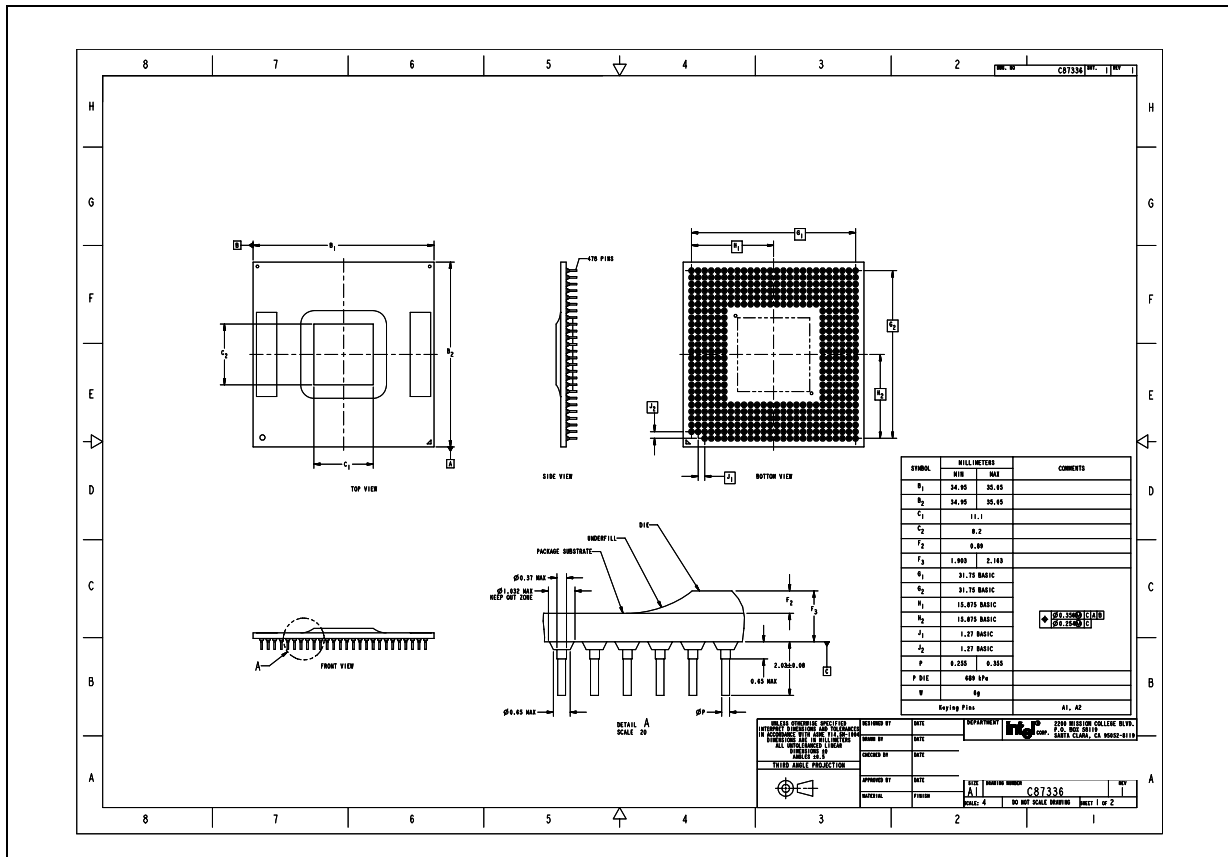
Micro-FCBGA Processor Package Drawing (Sheet 1 of 2)
